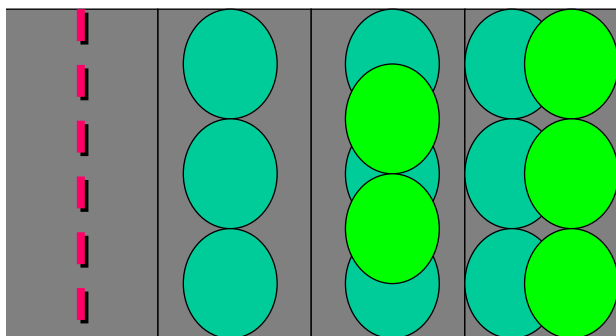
Laser welding configurations and tensile specimen used.
